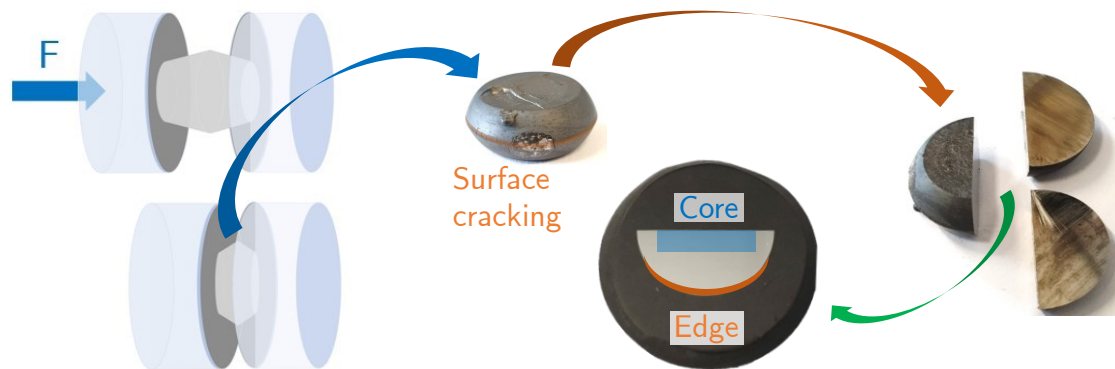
Schematic of the cutting and mounting process for Udimet 720 thermo-mechanically tested specimens.
